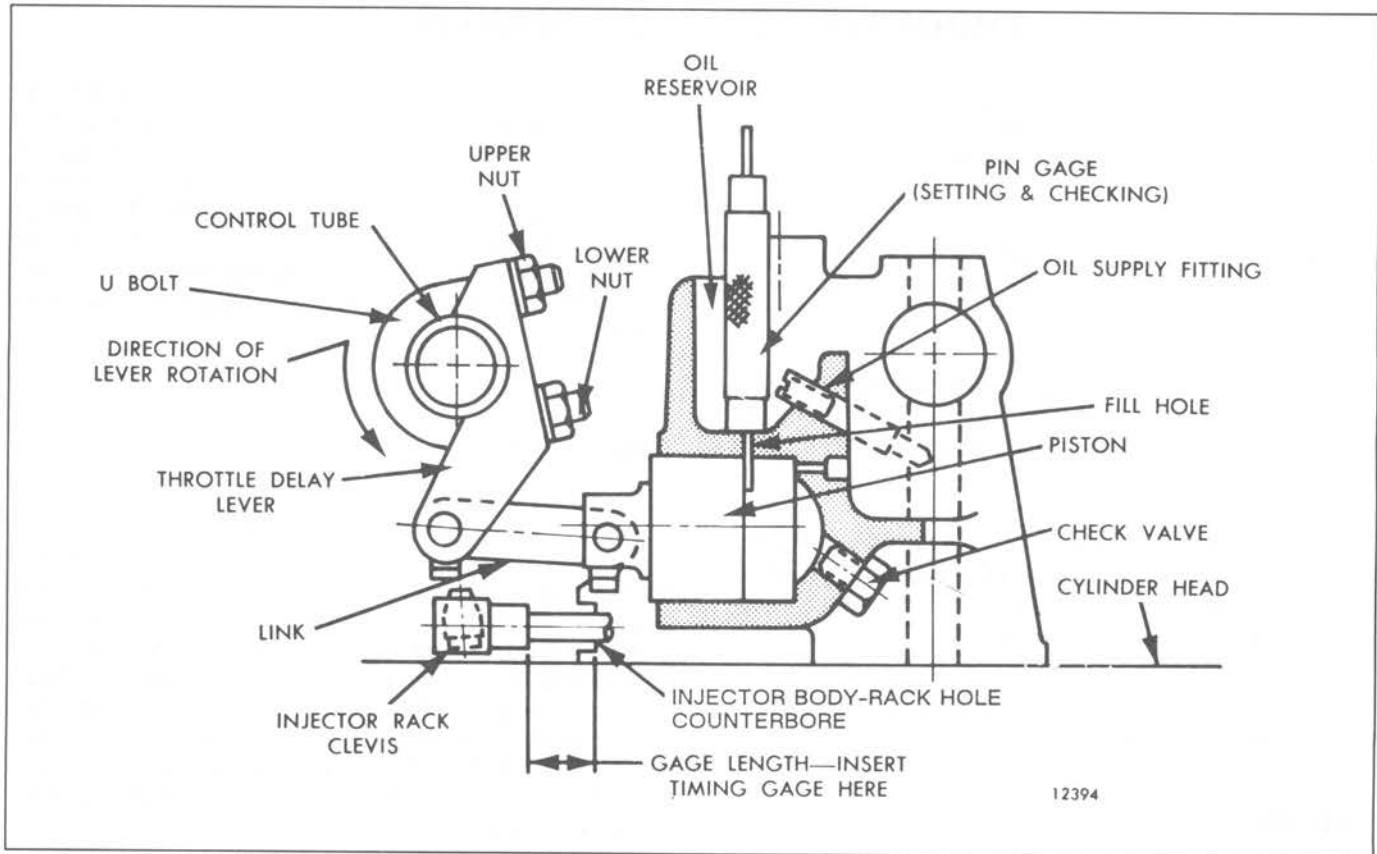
Adjusting Throttle Delay Cylinder (Current)
